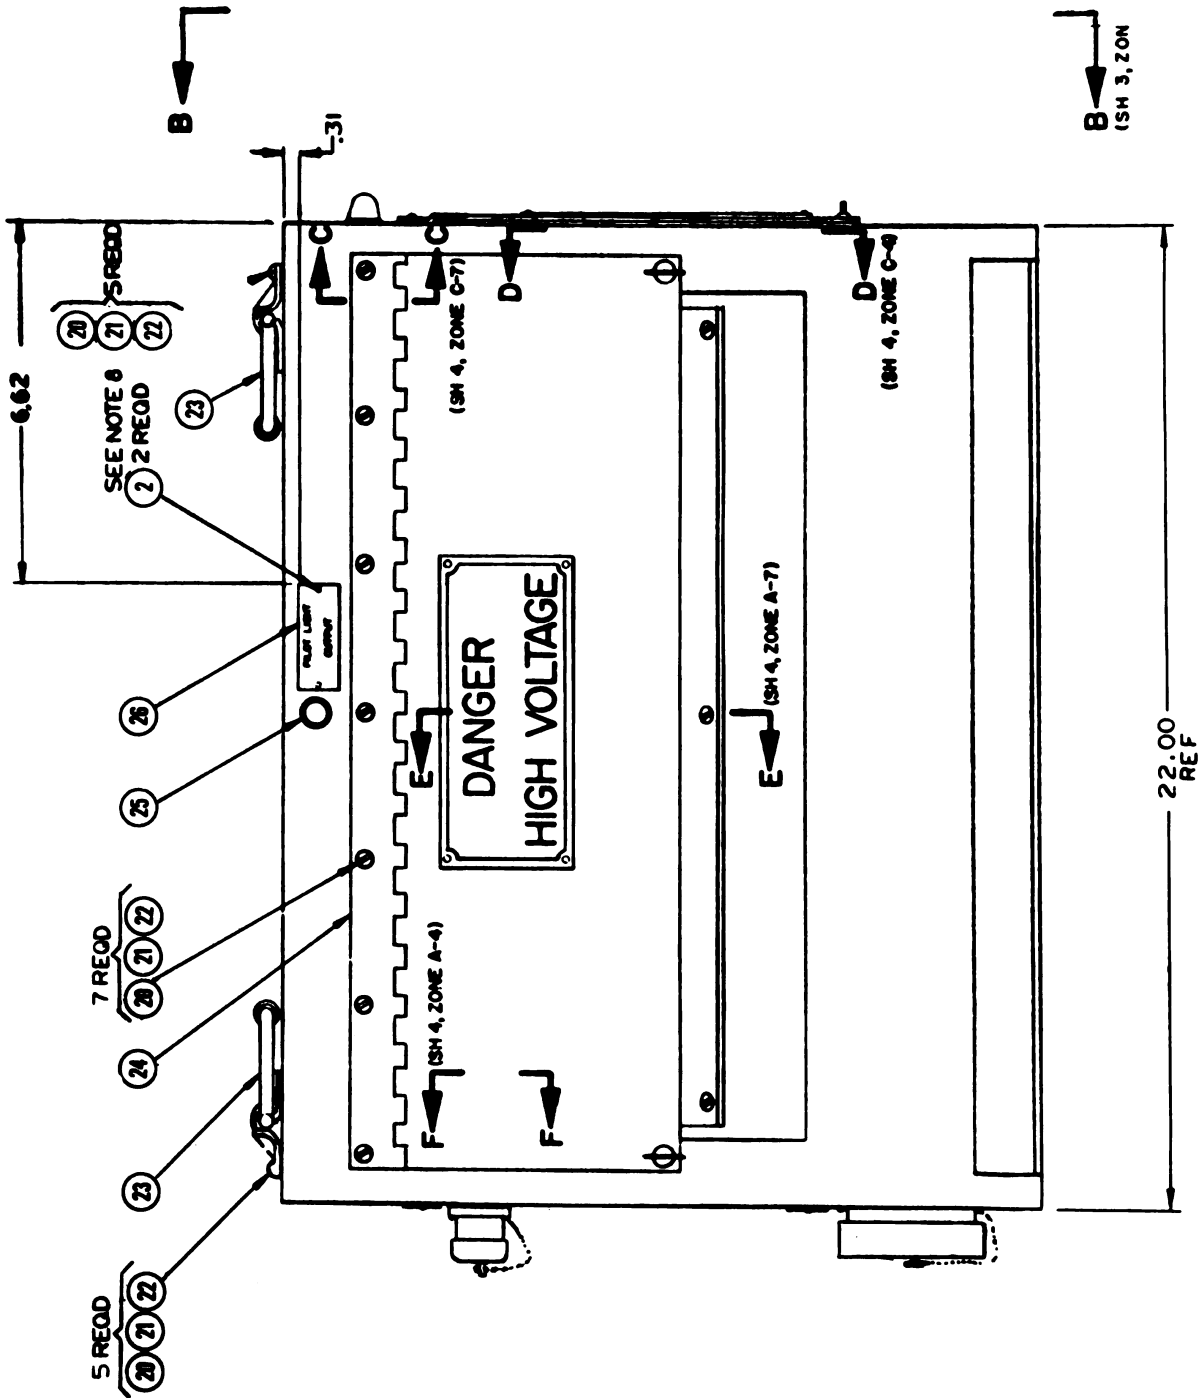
Switchbox Assembly (Sheet 2 of 7)
